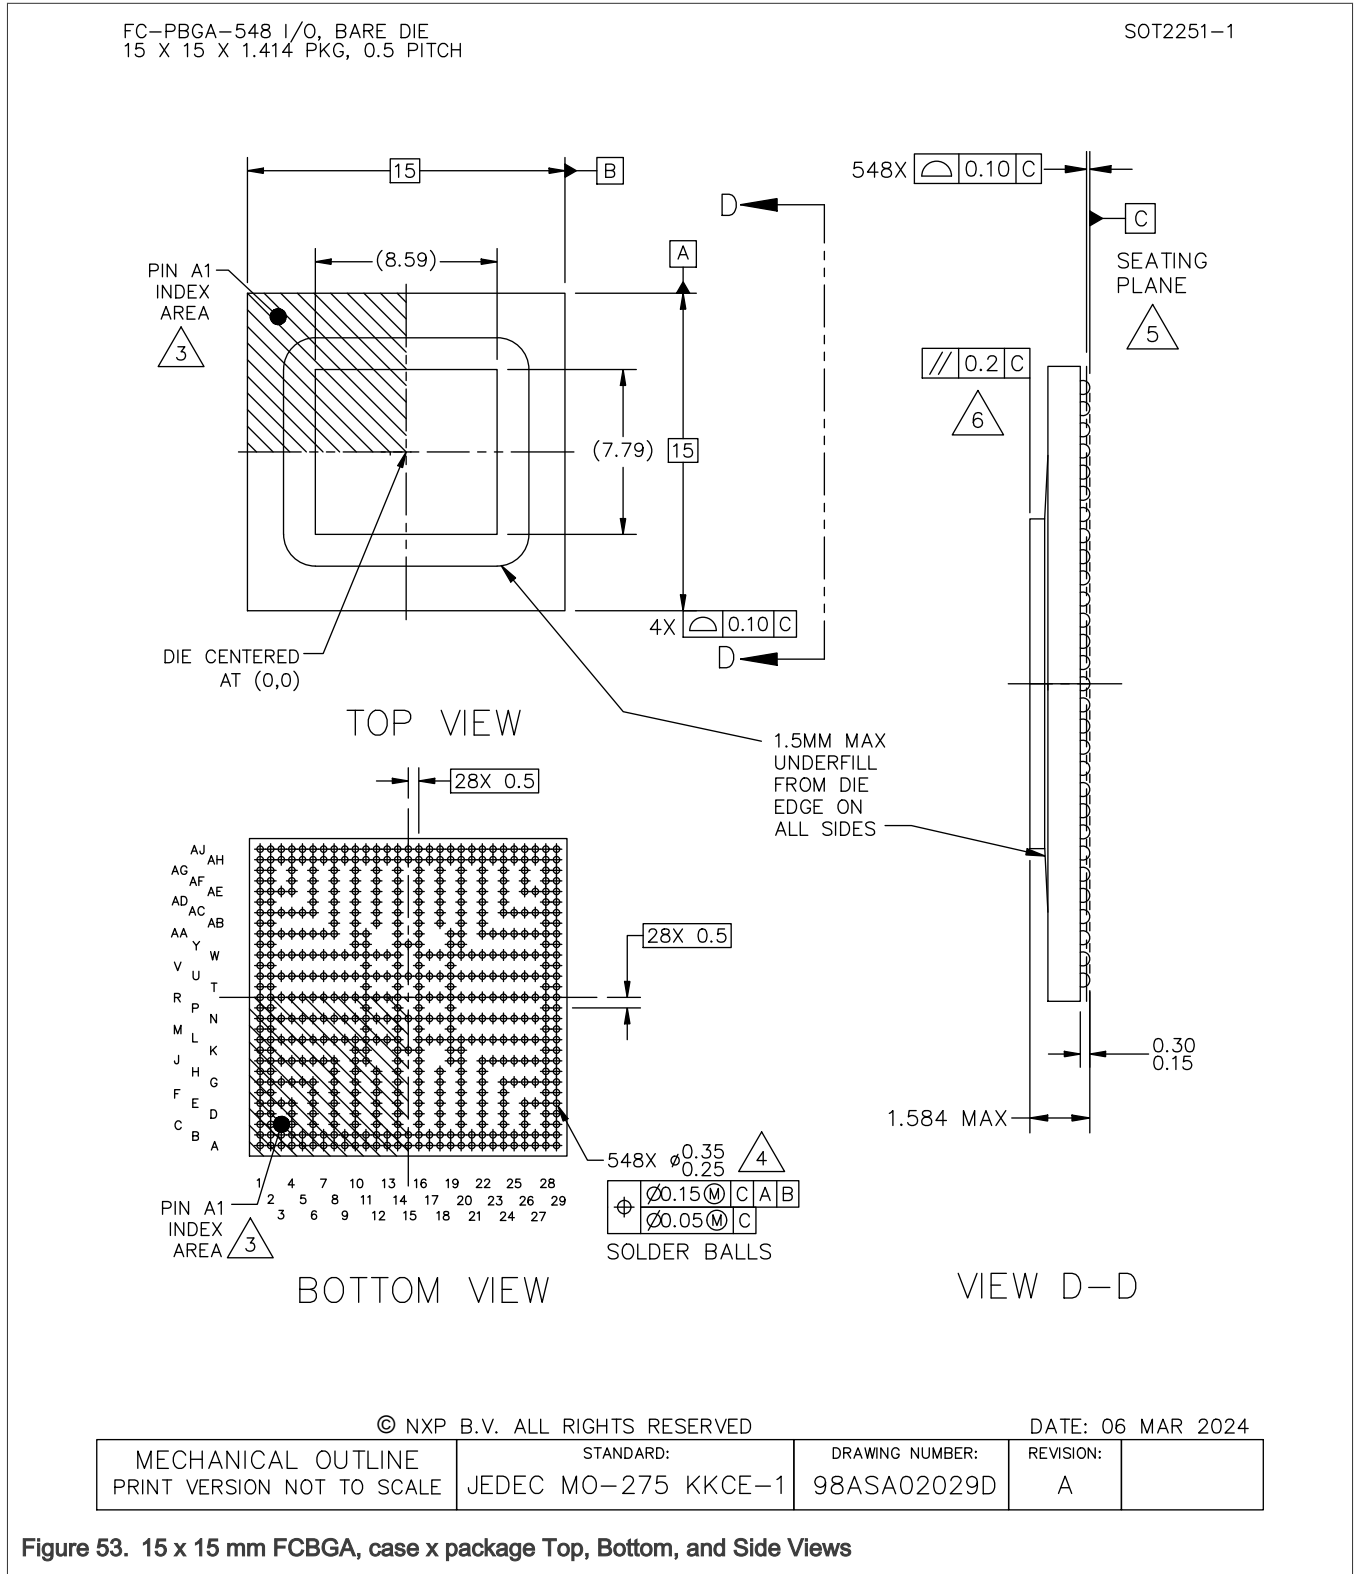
15 x 15 mm FCBGA, case x package Top, Bottom, and Side Views
